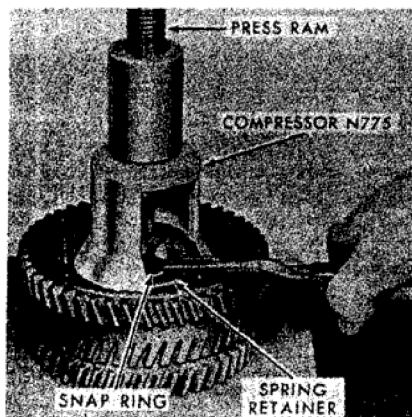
Compressing clutch piston return spring to permit retaining snap ring removal. Select-O-Speed clutch assembly is shown; however, procedure is same.
